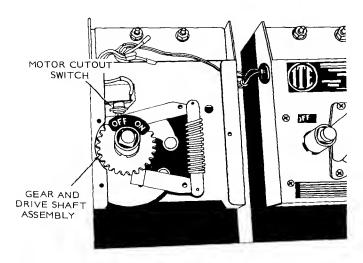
GEAR AND DRIVE ASSEMBLY OF TRANSFER SWITCH
